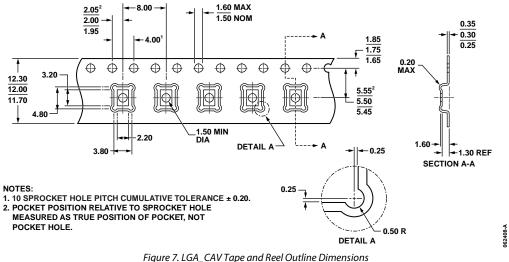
LGA_CAV Tape and Reel Outline Dimension. Dimensions shown in millimeters
